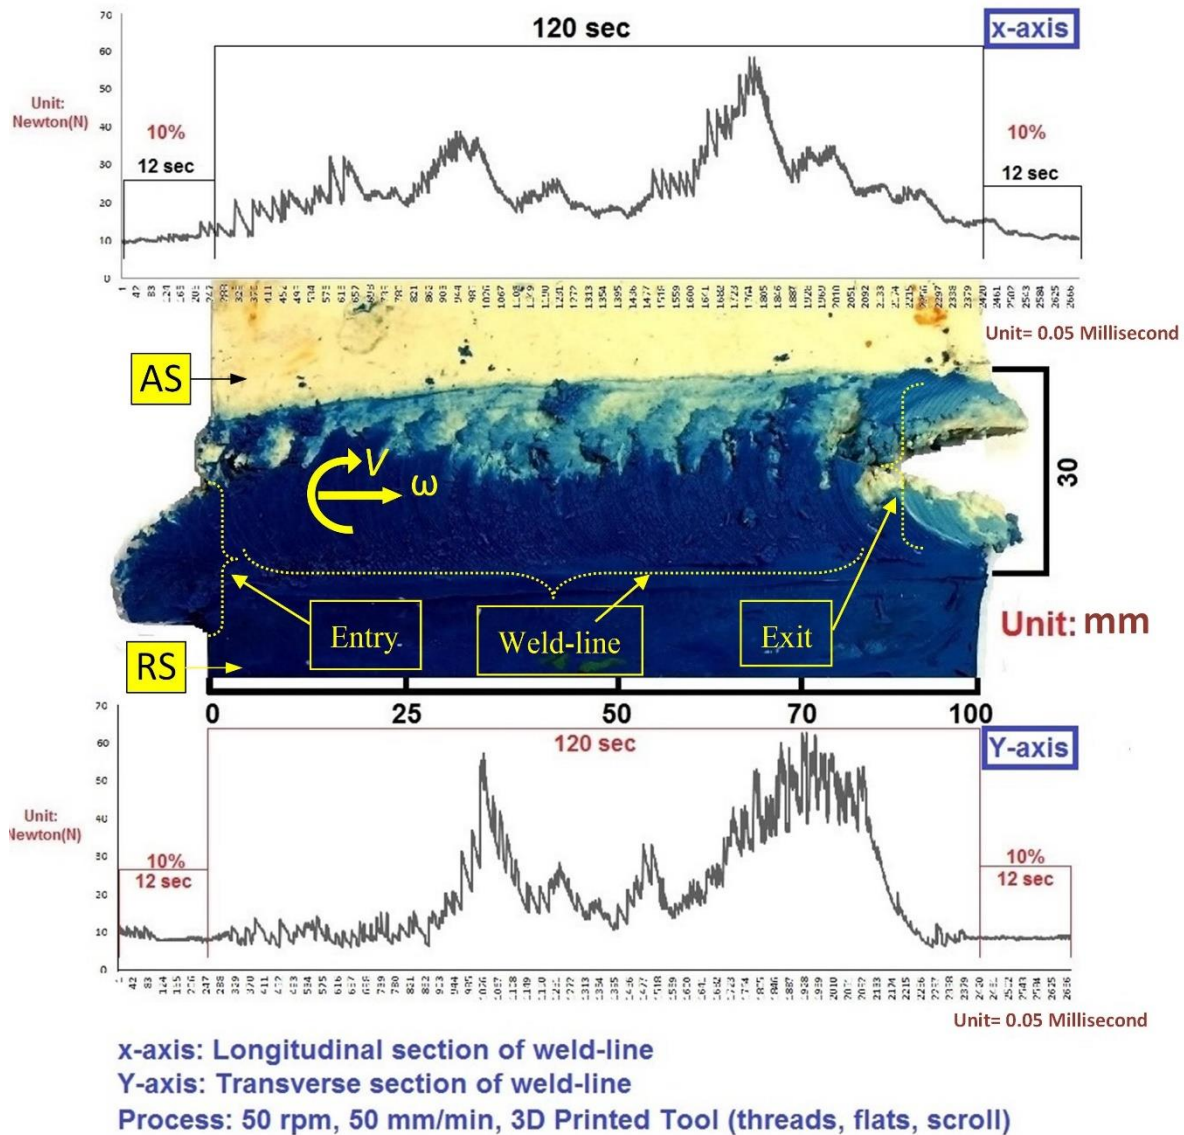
Photograph of the BFSW section sample (Top Surface): Plasticine Model. (a) entry zone of weld. (b) exit zone of weld. (c) weld-line body.
